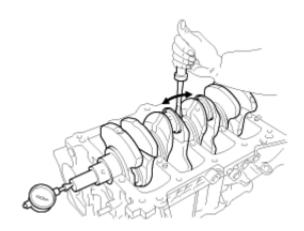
Checking Crankshaft End Play Courtesy of HYUNDAI MOTOR CO.
